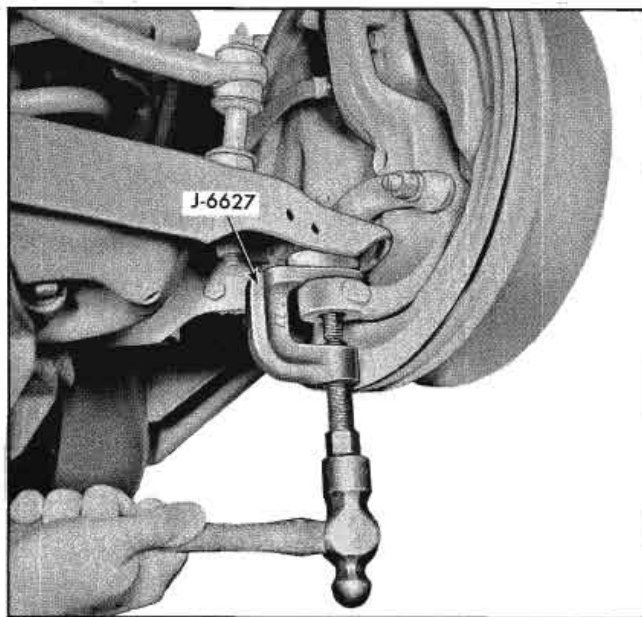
Pressing Lower Ball Stud from Steering Knuckle
